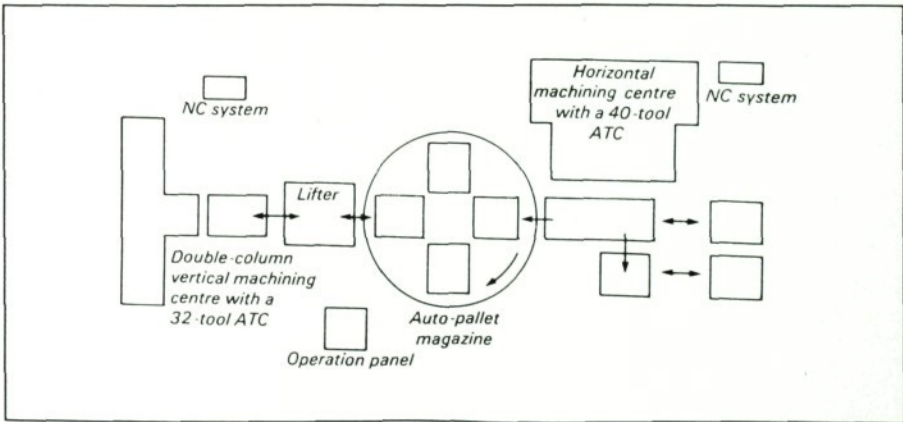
A multiple pallet's carrier between two machines is a neat solution to the handling of very large workpieces
